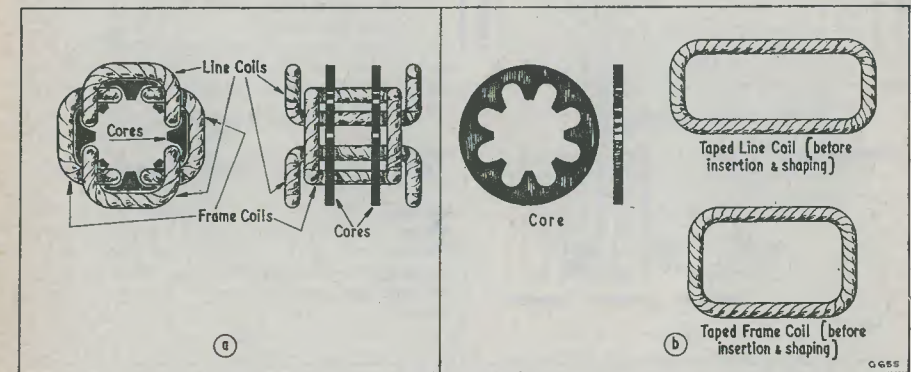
(a) A deflector coil assembly employing "castellated" cores. A circular clamp, not shown here, would be fitted around both cores to make the assembly rigid. (b) The main component parts of the deflector coil assembly of (a)
